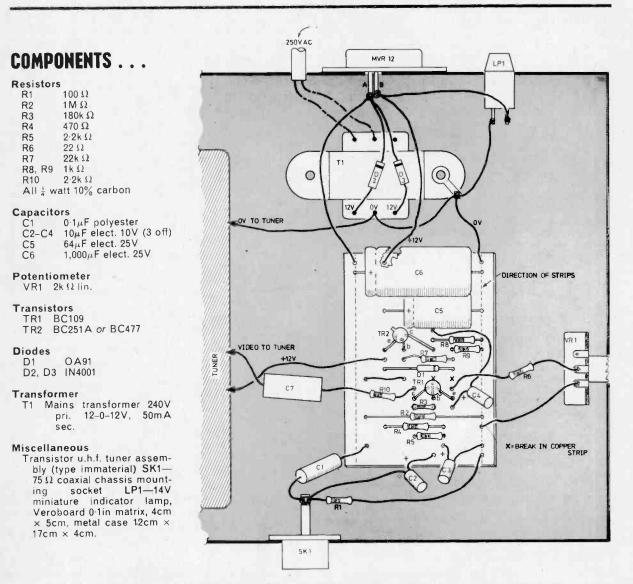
Component layout of sync separator, video inverter and power supply. Tuner unit is adjacent
